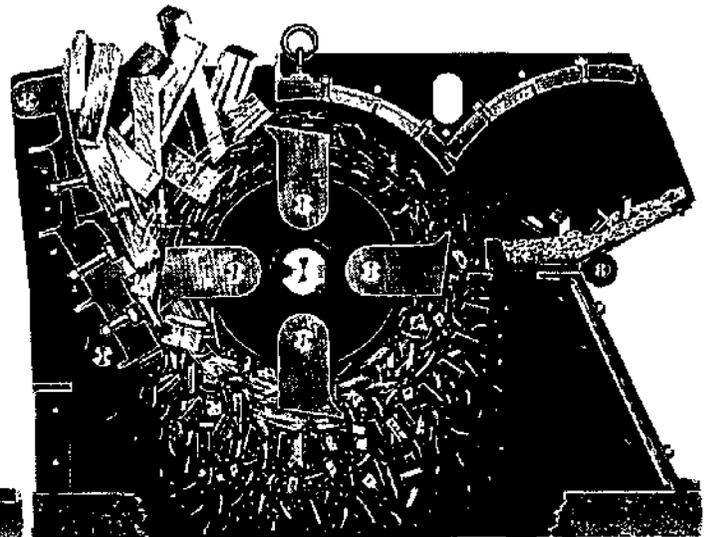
Sectional view illustrating the Williams "No-Nife" Hog type Shredder.
